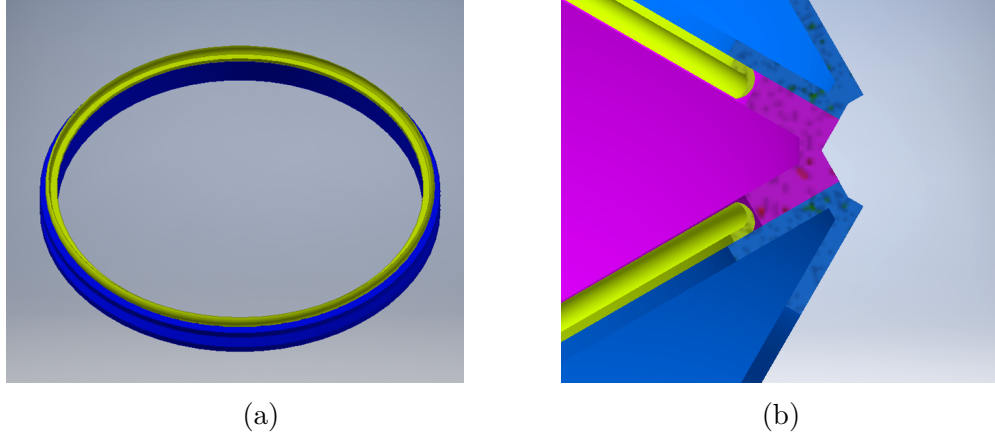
a. CAD of a PHASE inner race (blue) and pressure energized lip seal (yellow) b. CAD cross section of the lip seal (yellow) in a fully assembled prototype. The outer bearing race represented in blue, and the inner bearing race is represented in purple. Note that the actual bearing races are not rendered here.
